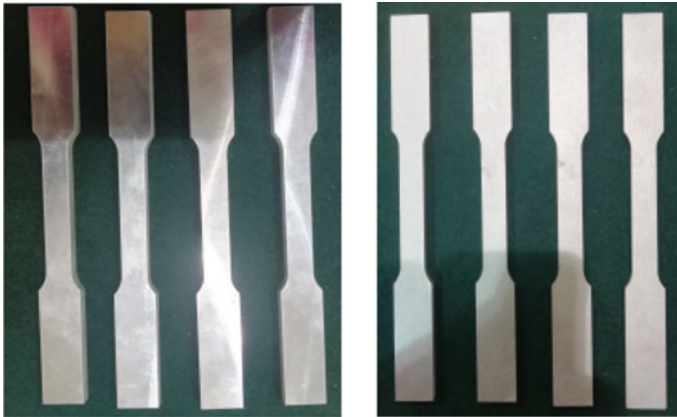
Mechanical milled and chemical milled tensile test specimens
